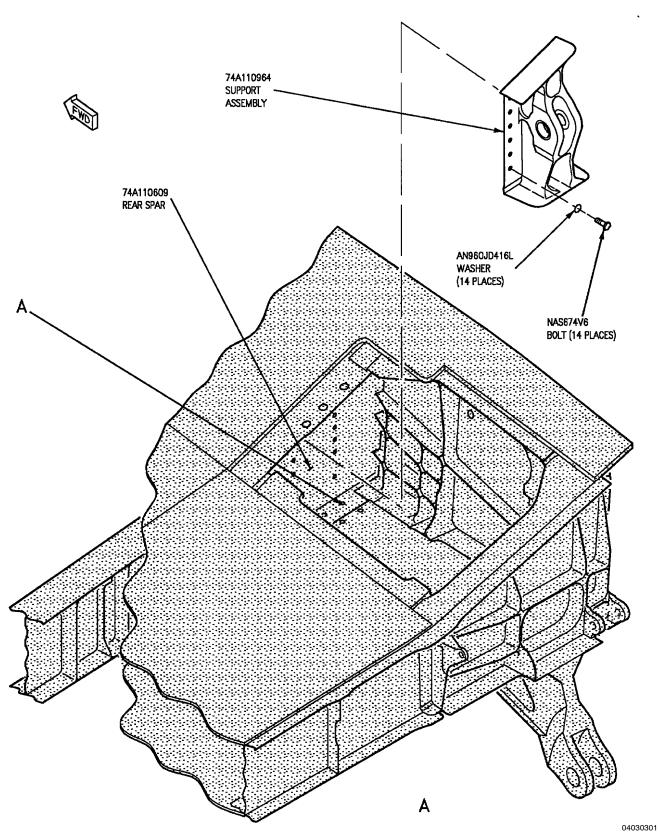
Installation of 74A110964 Actuator Support Assembly (Sheet 1)
